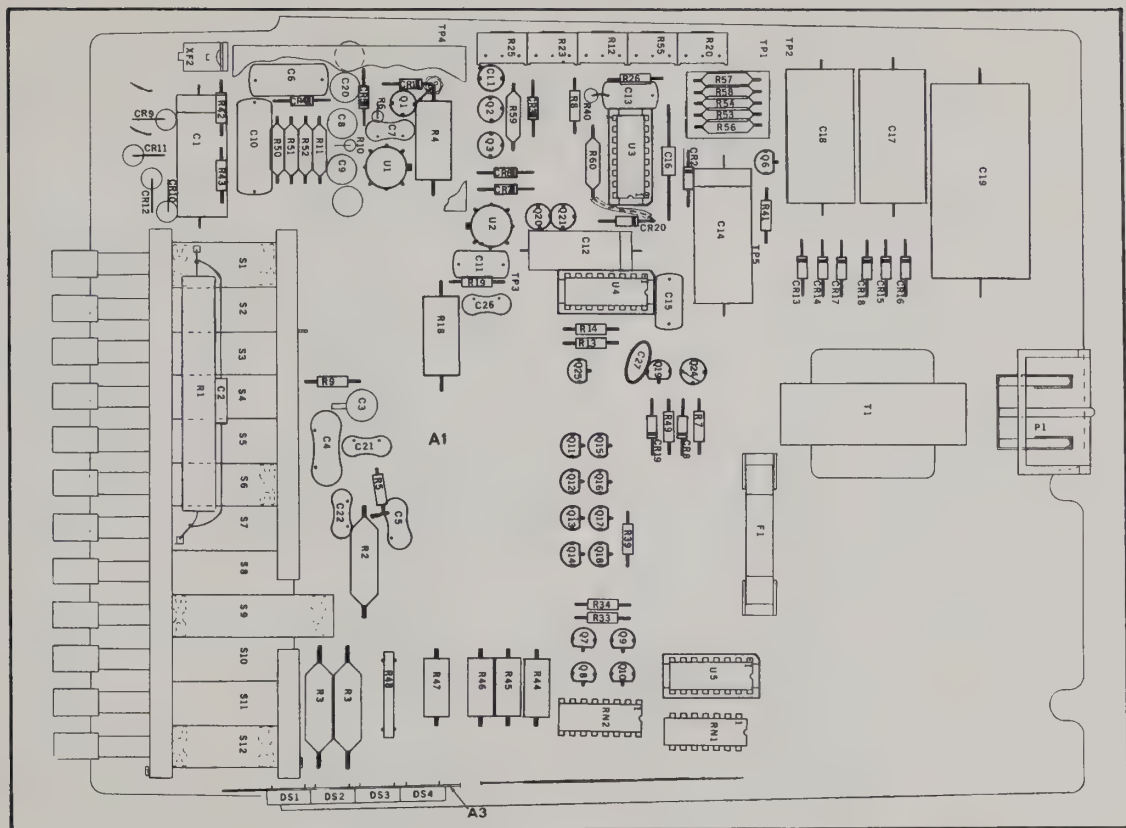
8000A MAIN PCB ASSEMBLY
